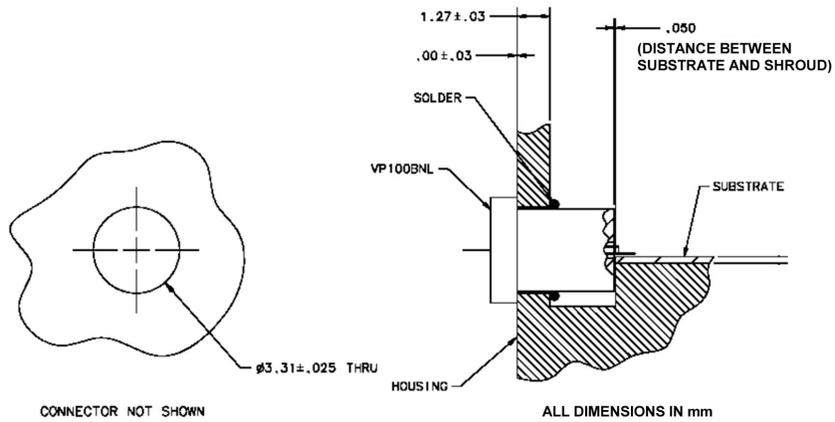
VP100BNL Mounting Hole Dimensions and Assembly Drawing for Thin-wall housing
